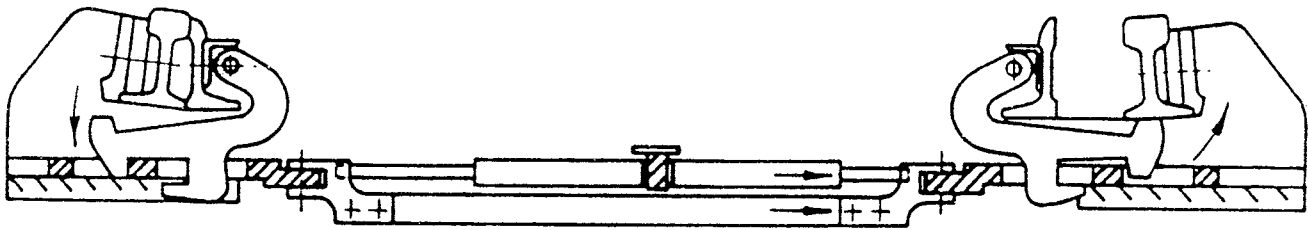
WESTINGHOUSE STYLE M63 POINT MACHINE DRIVE AND LOCK MOVEMENT
